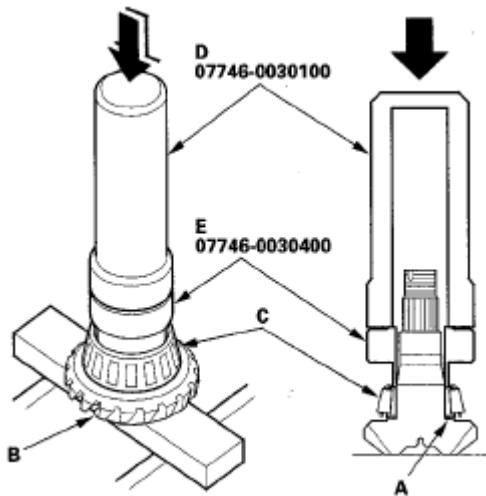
Installing Thrust Shim, Transfer Output Shaft And Tapered Roller Bearing With Driver Handle
